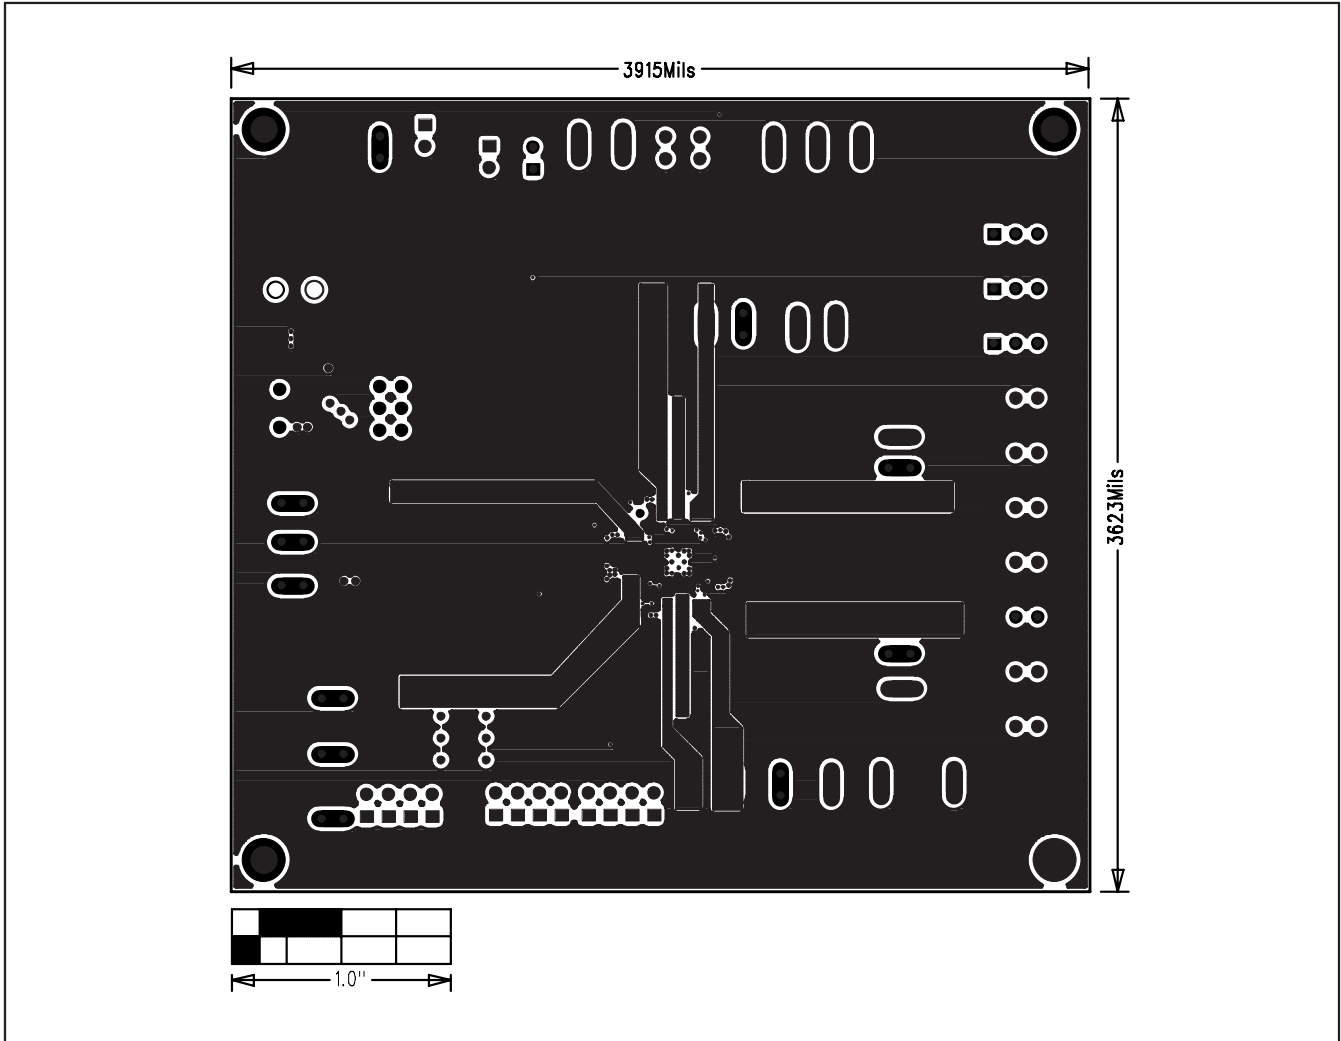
MAX8663 EV Kit PCB Layout—Power Layer 3
